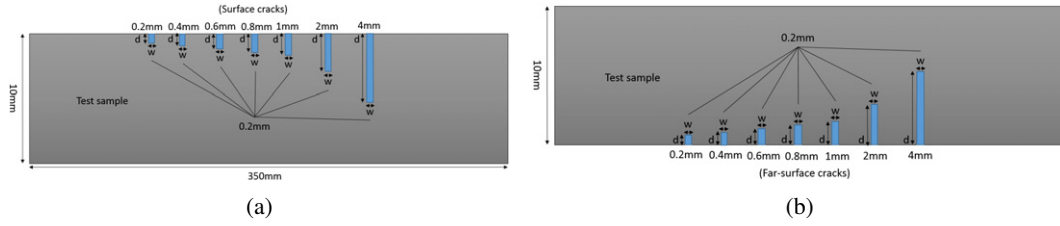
Showing a schematic layout of the test sample with (a) surface cracks and (b) far-surface cracks.
